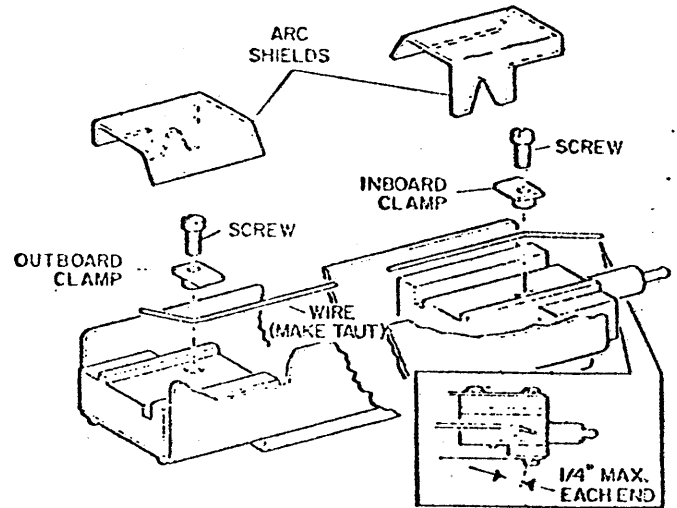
B. Restringing of Transfer, Pre-transfer, and Charge Corotrons
